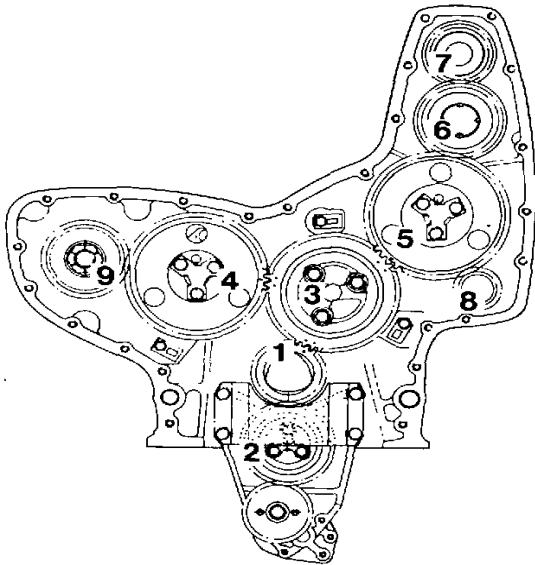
Auxiliary drive gears, T(I)D120, T(I)D121
